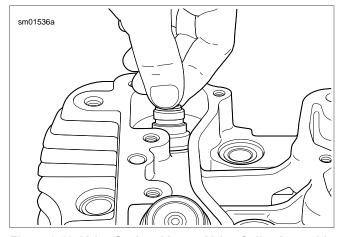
Valve Seal and Lower Valve Collar Assembly Installation
